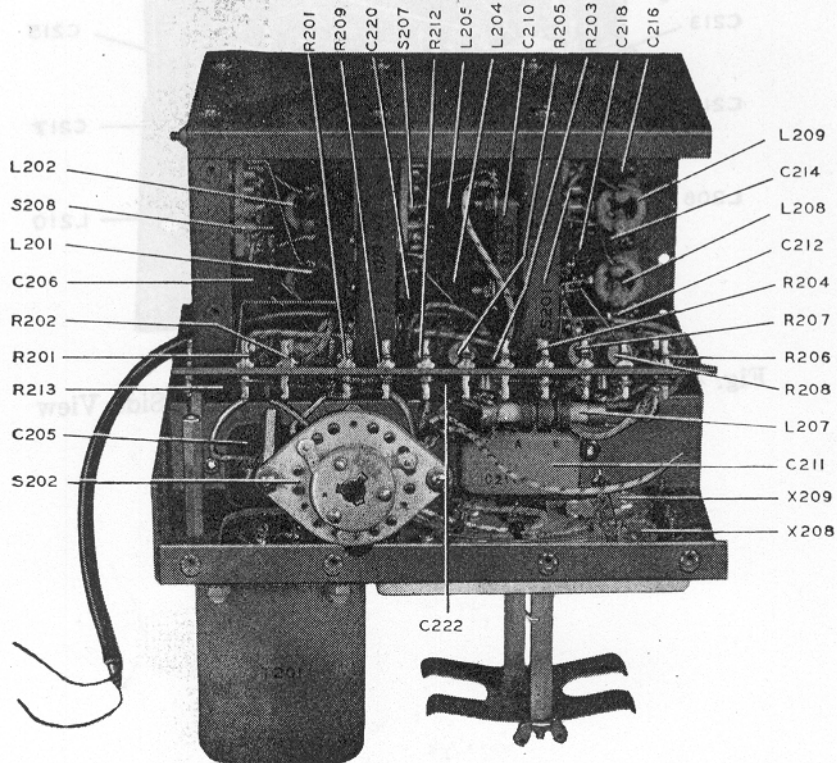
Receiver R-F Chassis Assembly—Bottom View
